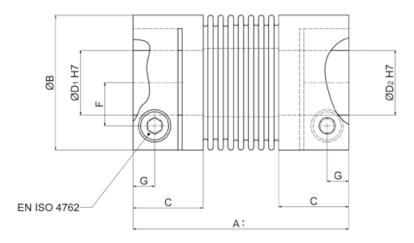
Dimensions of the coupling for AXBG\_S\_G
